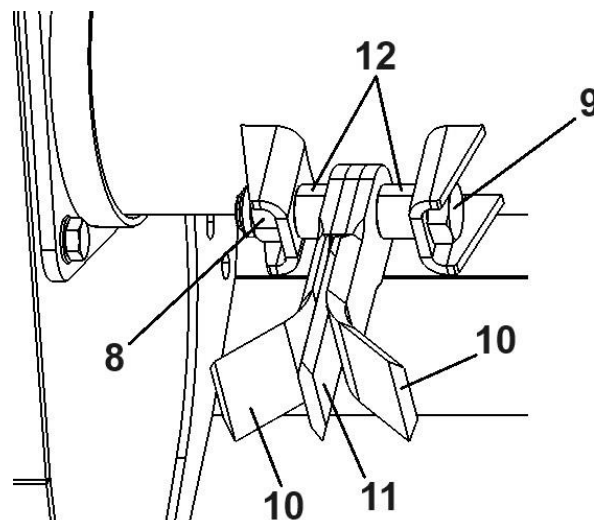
Replacing the cutting blades: 8 – fastening nut, 9 – fastening bolt, 10 – “Y”-type blade, 11 – straight blade, 12 – bushing
